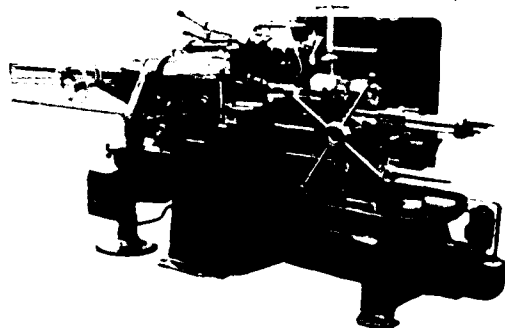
No. 3A Staybolt Capstan Lathe with tooling equipment for machining Firebox Staybolts.
